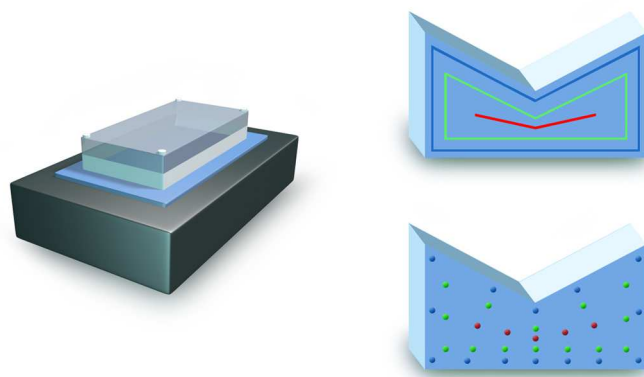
Friction Stir Spot Welding points definition and selections
